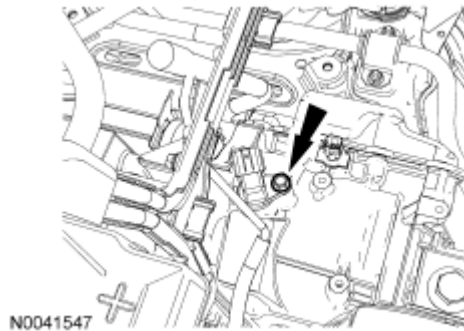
Locating Intermediate Shaft Speed Sensor Bolt
